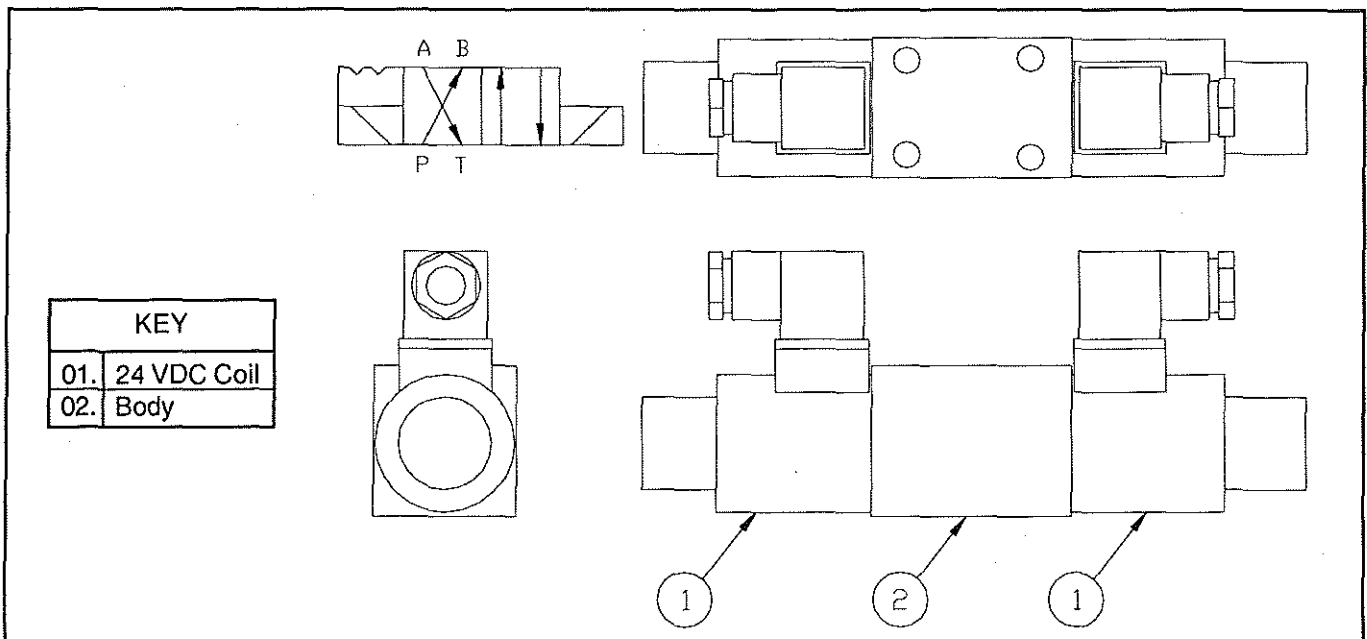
PARK BRAKE SOLENOID VALVE ASSEMBLY - LATER PRODUCTION VERSION (57060)
